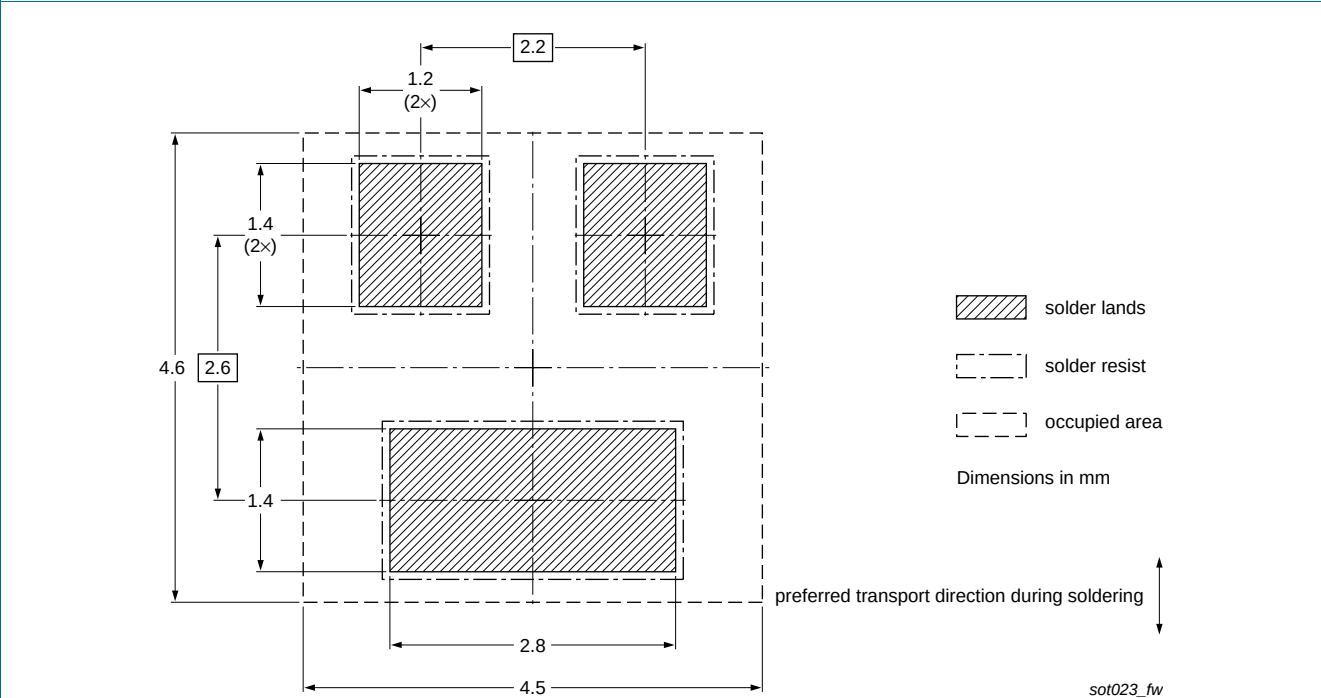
Wave soldering footprint for SOT23 (TO-236AB)
